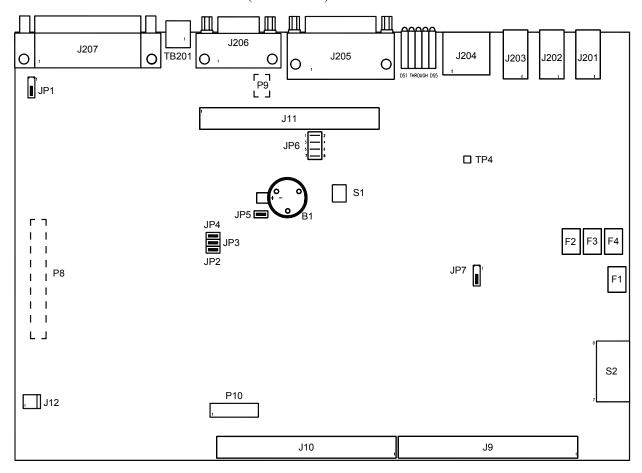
Ndrive HP Control Board Assembly (690D1577 Rev. A)
